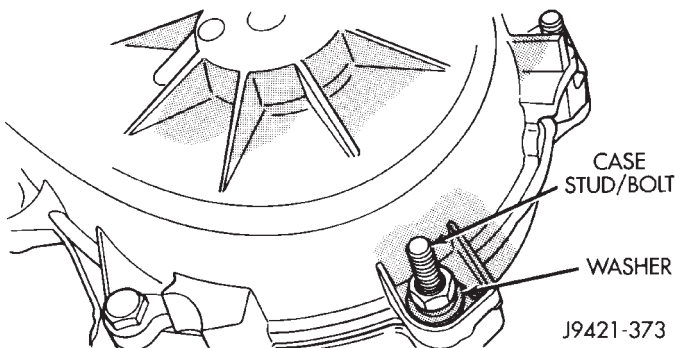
Washer Installation On Case Stud And Dowel Bolts
